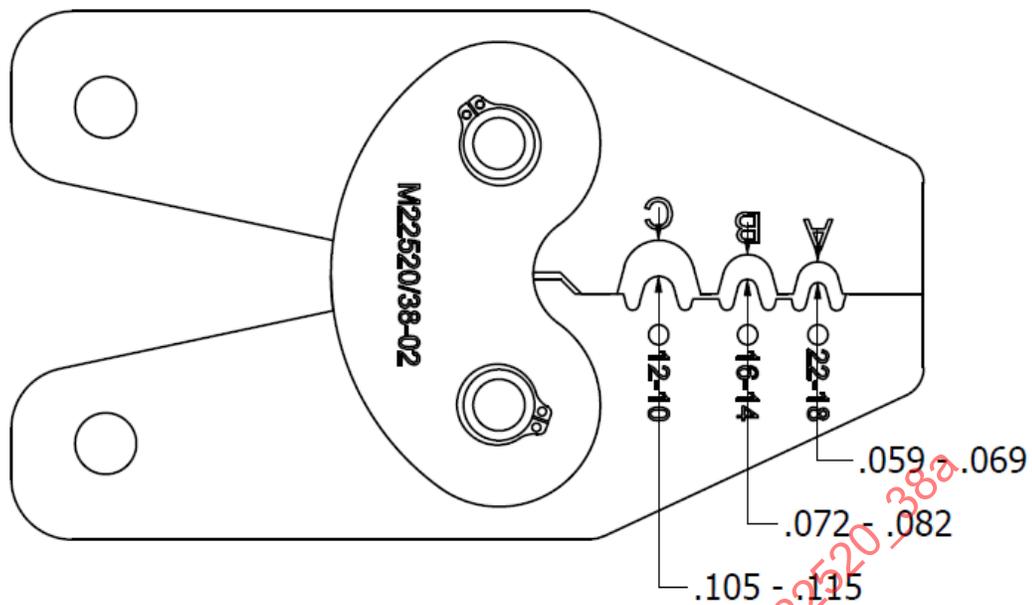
M22520/38-02 TOOL CRIMP CAVITY DIMENSIONS
